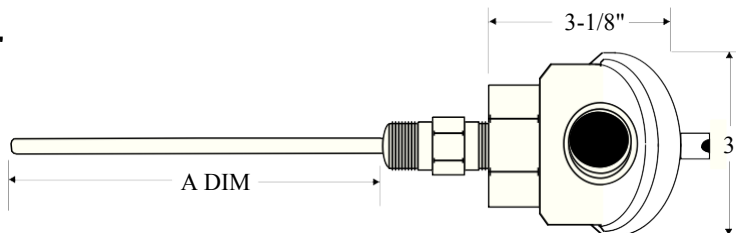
Thermocouple terminated with hinged flip top cover weatherproof head and 1/2" x 1/2" NPT x 1-1/2" long 316 SS NPT mounting fitting brazed to sheath. For spring loading add "SL" to end of part number. Spring loaded type is not sealed from process and is generally used with a thermowell.
